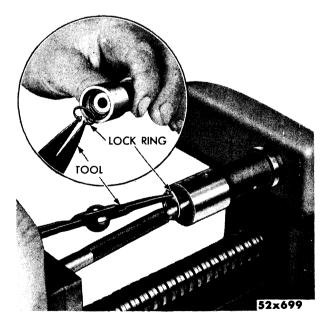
Disassembly or Assembly of Pressure Relief and Flow Control Valve (Tool C-3229)
